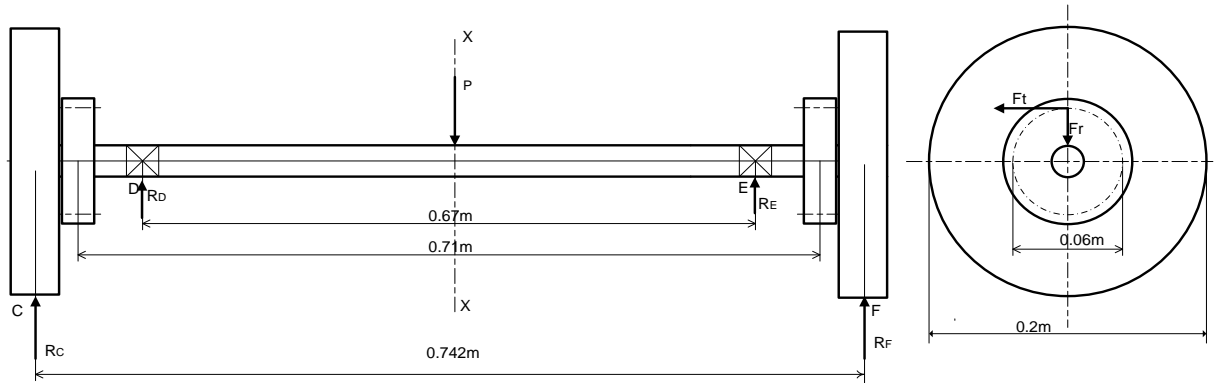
Free body diagram of spur gears and back wheels engagement shaft
